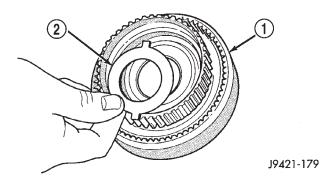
Positioning Thrust Plate On Front Annulus Support
